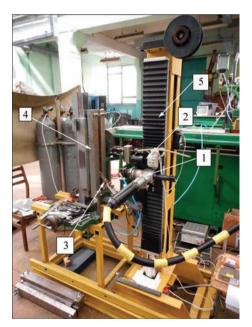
Part of the laboratory bench for optimization technological techniques of laser welding in a vertical spatial position: 1 — head for laser welding; 2 — manipulator carriage; 3 — gas shielding; 4 — clamp; 5 — manipulator beam (*Z* axis)
